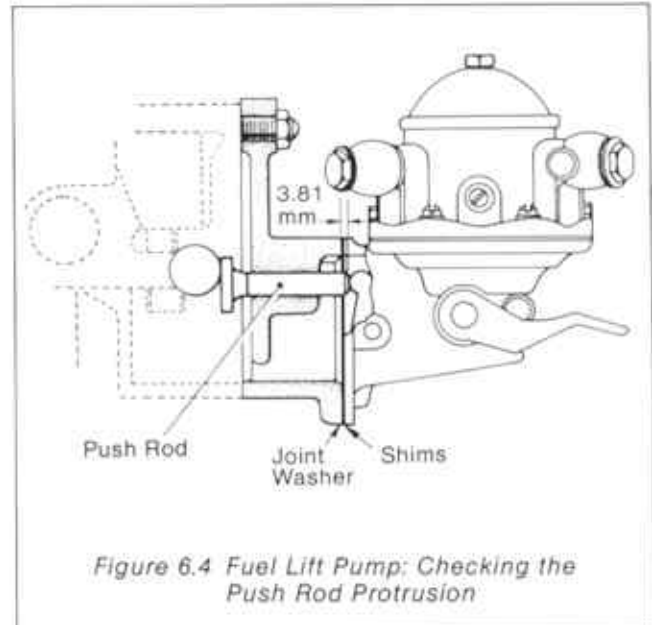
Fuel Lift Pump: Checking the Push Rod Protrusion
